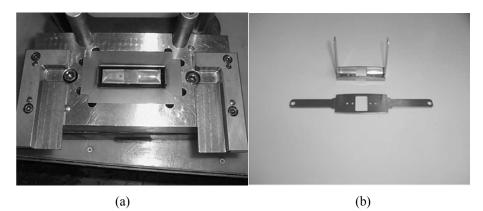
PECVD Ti(C,N) coated forming tool (AISI A11 cold- worked steel) and parts produced using this tool.
